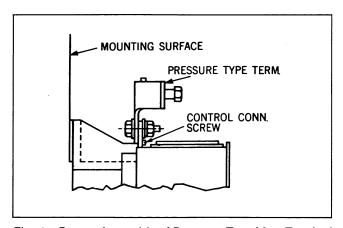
Proper Assembly of Pressure Type Line Terminal
